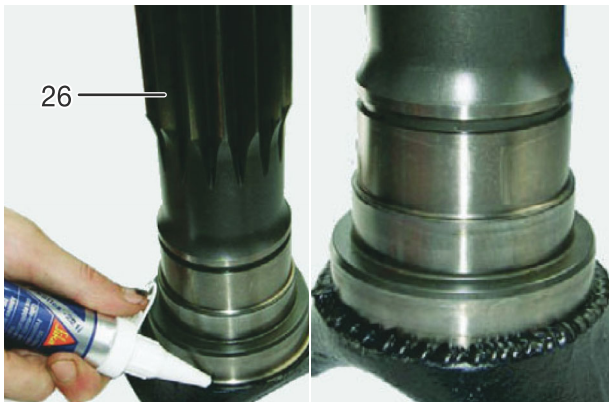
Coat the sun gear-seal ring coupling surface with Sikaflex 221.
